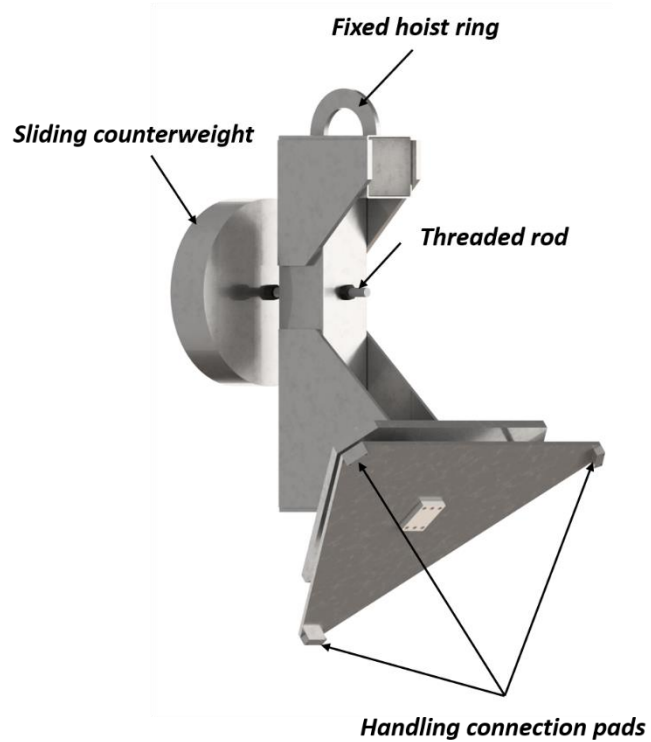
C-shaped handling for M7 installation. The interface between M7 and the handling is between the 3 branches embracing M7 and the 3 connection pads of the handling. The handling is equipped with a fixed hoist ring and movable counterweight to tune the position of the barycentre.
